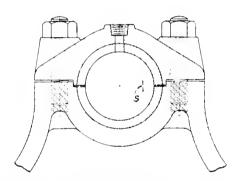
A form of Rigid Bearing that satisfies Diesel Engine Requirements
